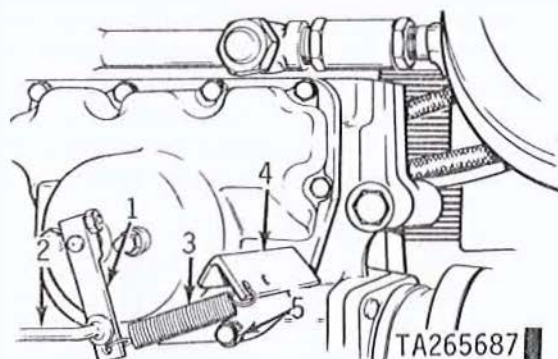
Oil filler tube upper support, model AVDS-1790-2DR engine.
